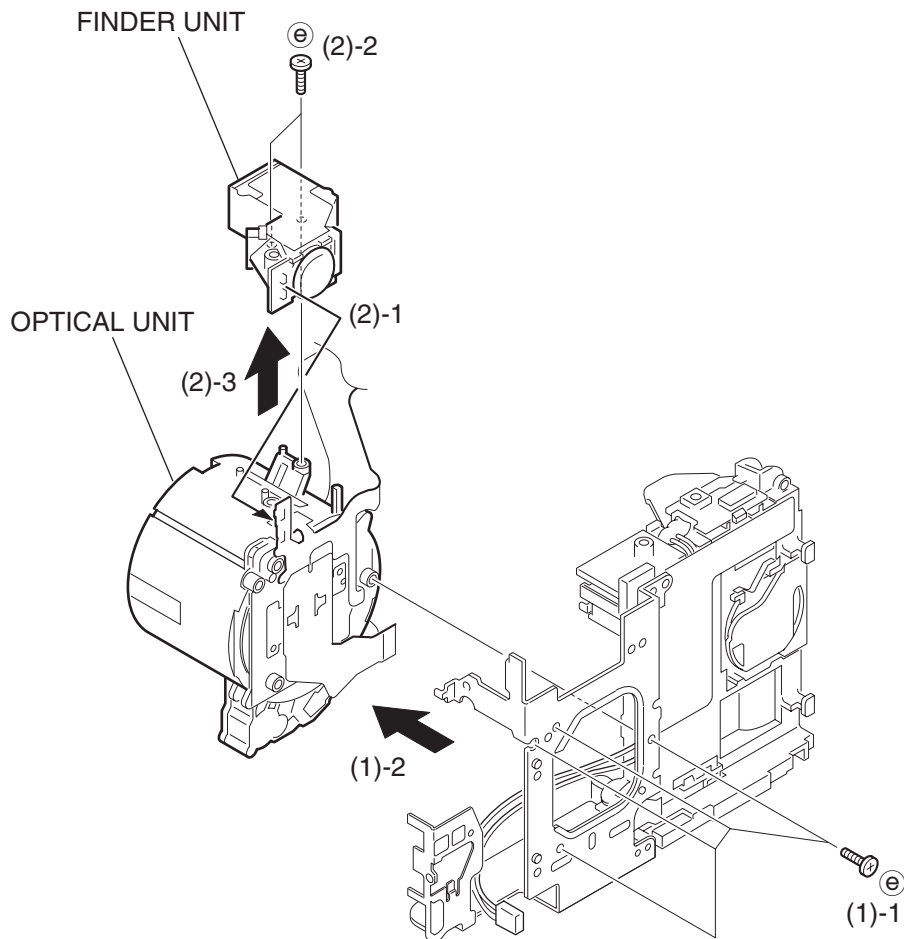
OPTICAL UNIT, FINDER UNIT
